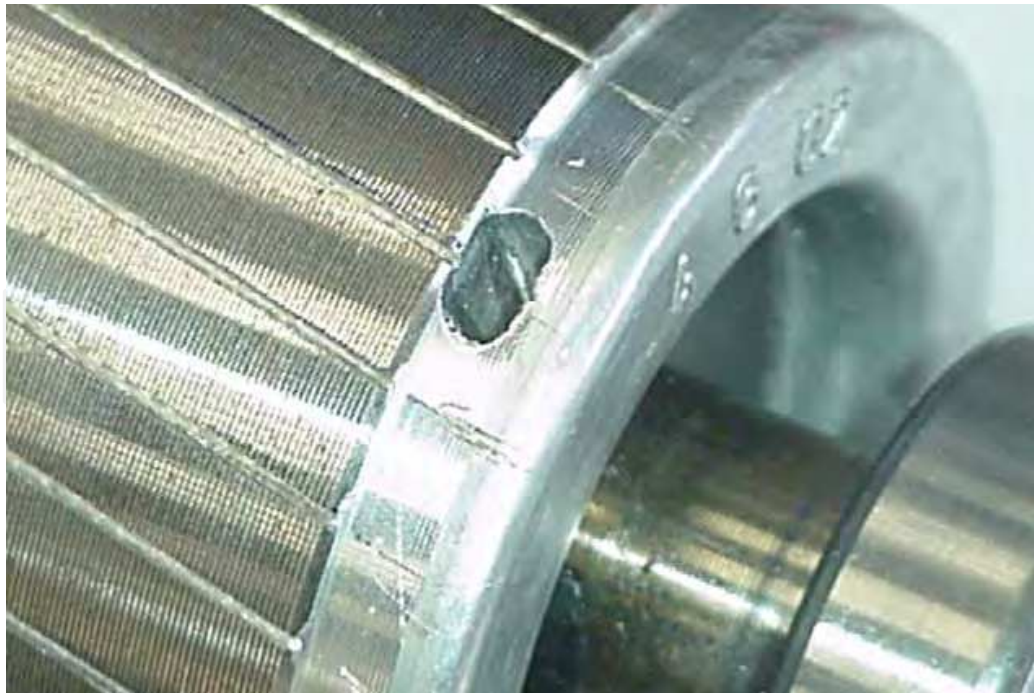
Rotor modified to break a rotor bar by drilling the end-ring.
